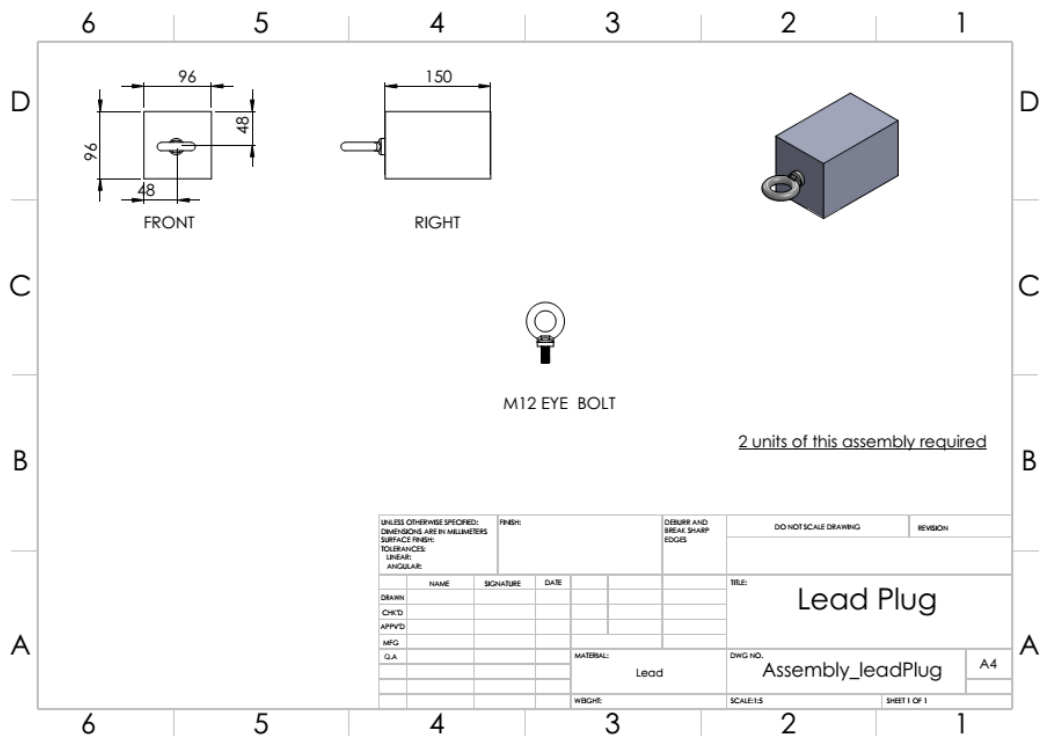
Design of Lead plug. This part will be made of solid Lead with an eye bolt for handling (2 units).
